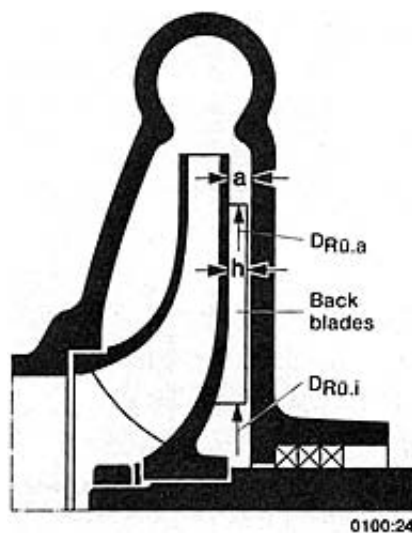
Axial force single stage centrifugal pump with back shroud blades
